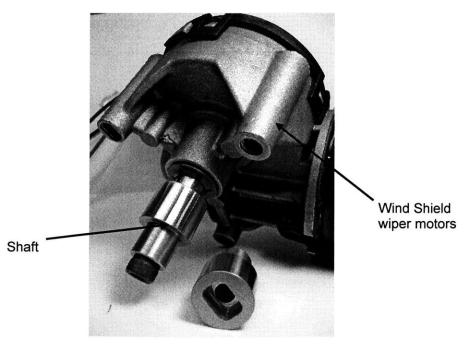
Shafts that fit tight to the wind shield wiper motor's output shaft
